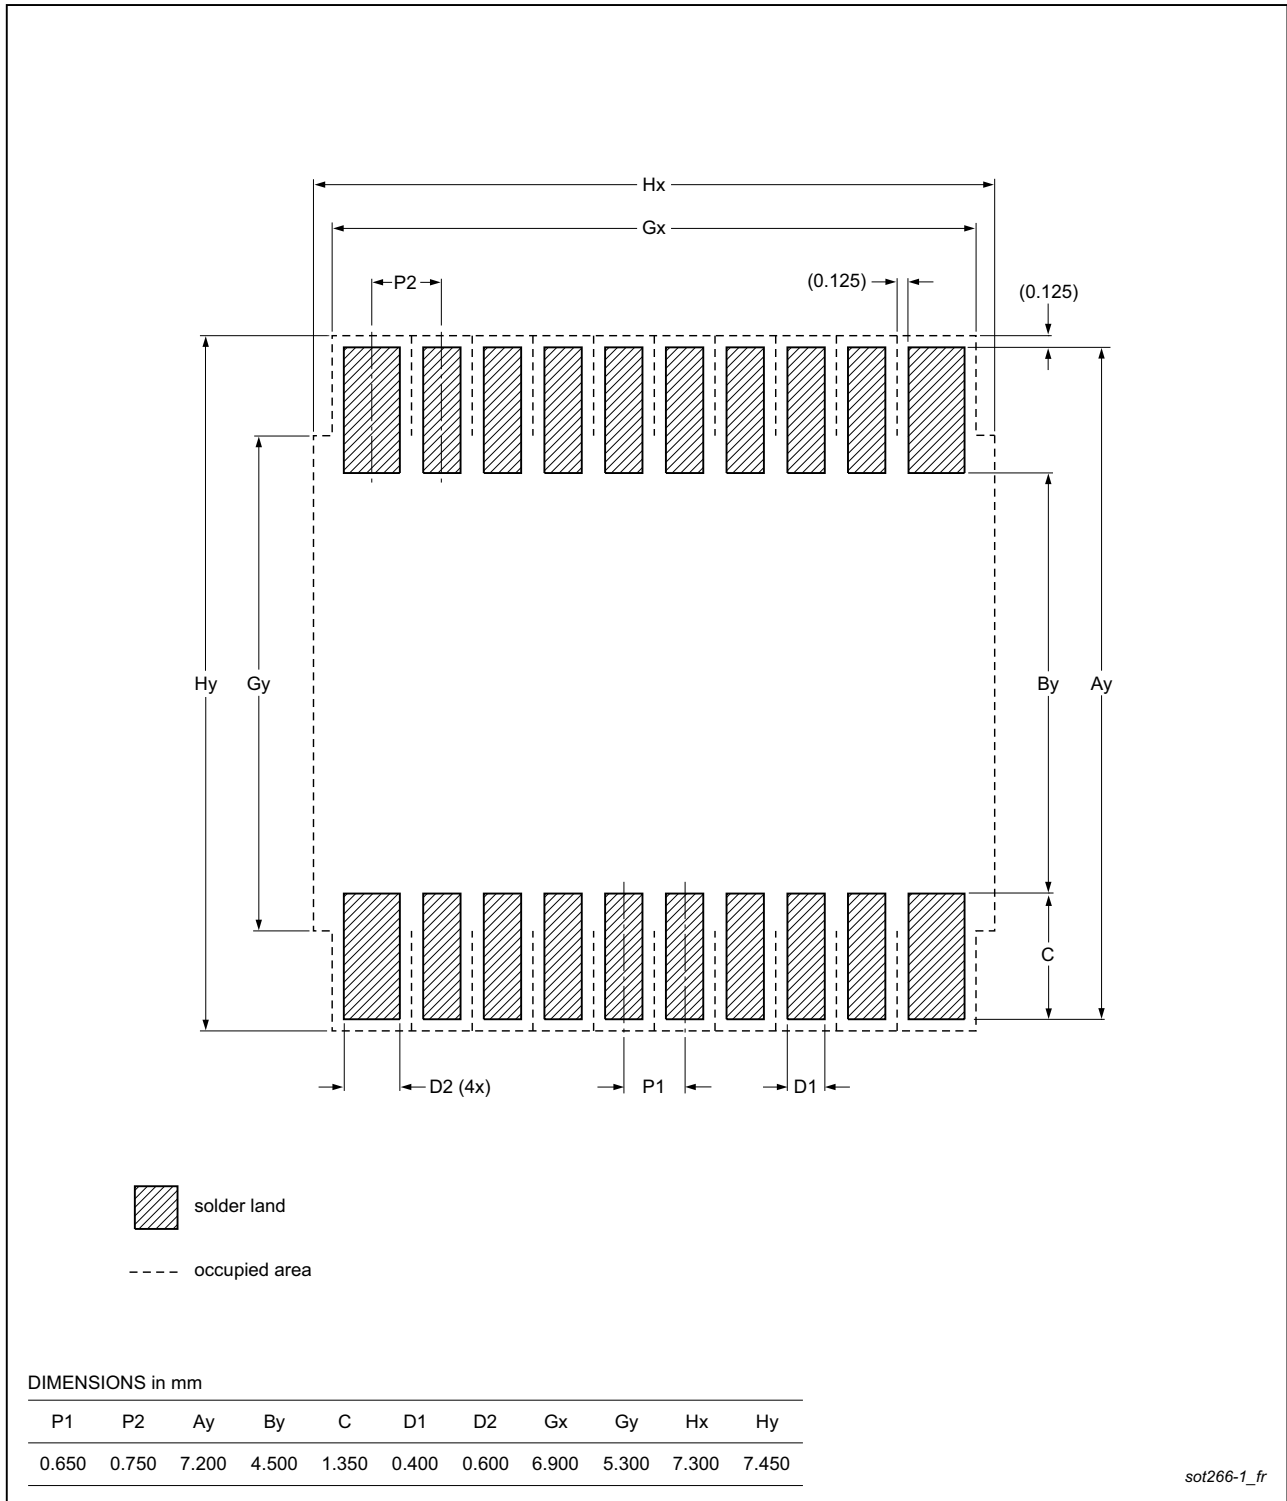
PCB footprint for SOT266-1 (SSOP20); reflow soldering
